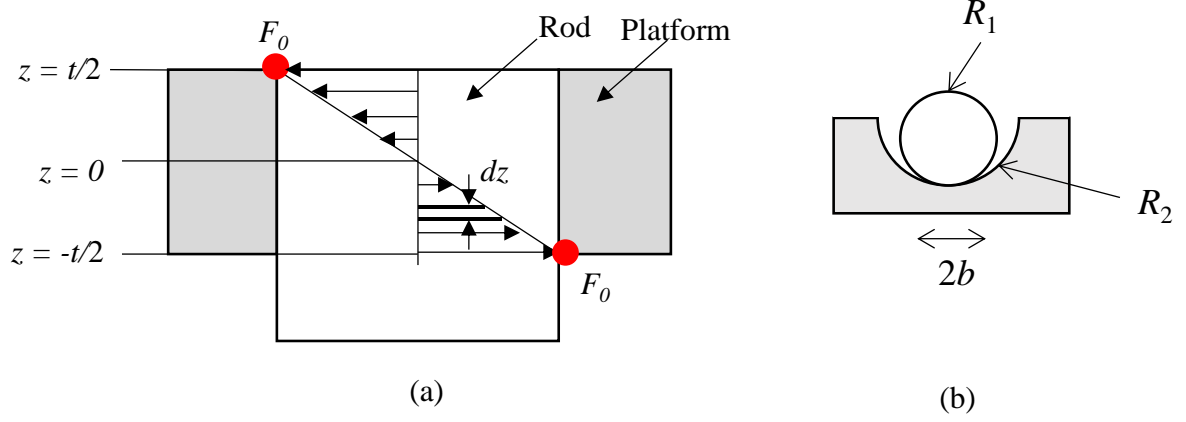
Schematic showing the flexure rod inserted to the platform (a) Front view (b) Top view
